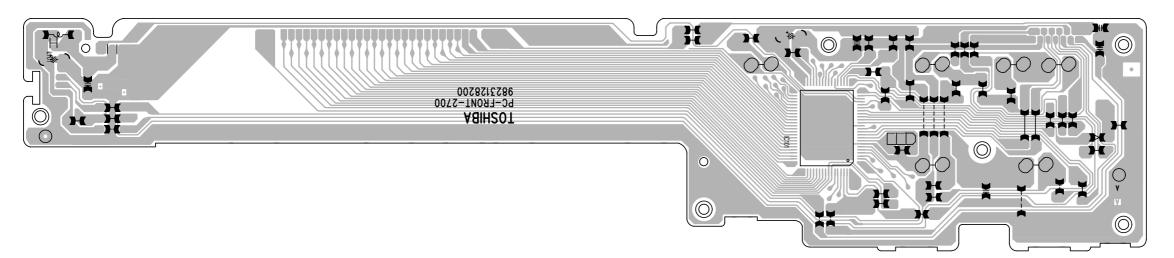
EU03 Front Display PC Board (Bottom Side)
